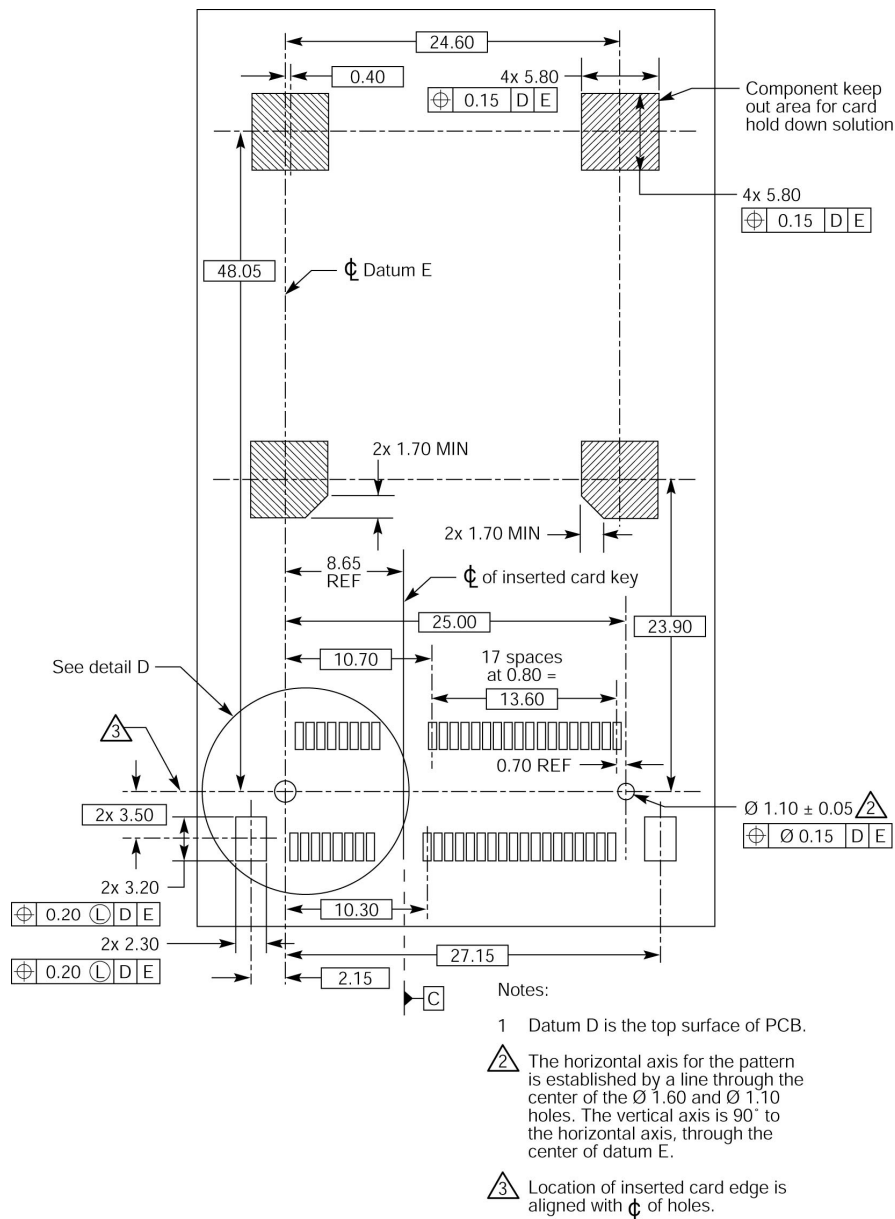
Recommended System Board Layout for Dual-Use Socket
